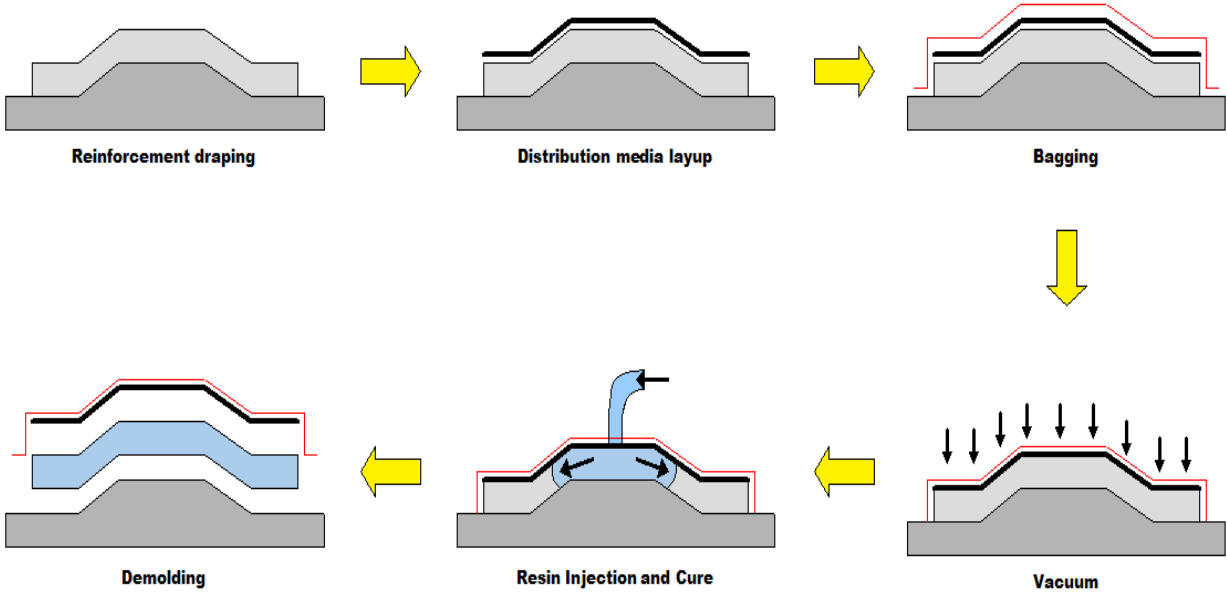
Schematic of the vacuum assisted resin transfer molding process
